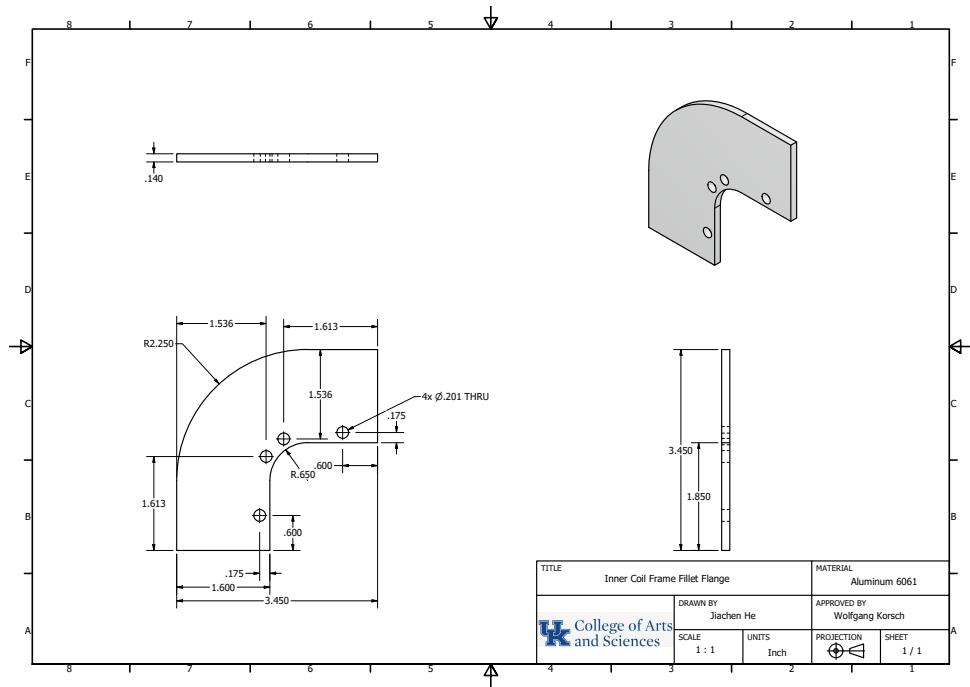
Inner Coil Frame Fillet Flange (Material: Aluminum 6061)
